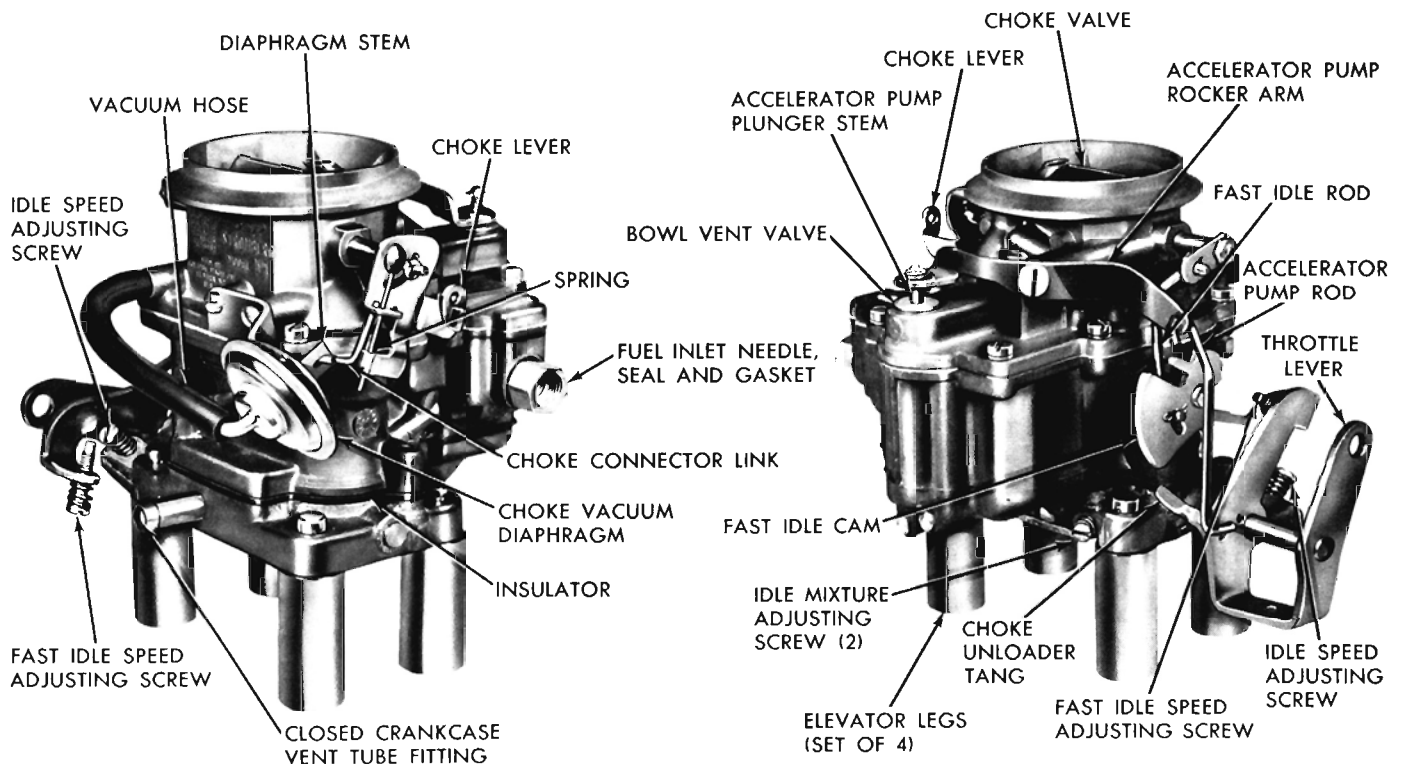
Carburetor Assembly (WW3-248, 249, 250 and 251)
